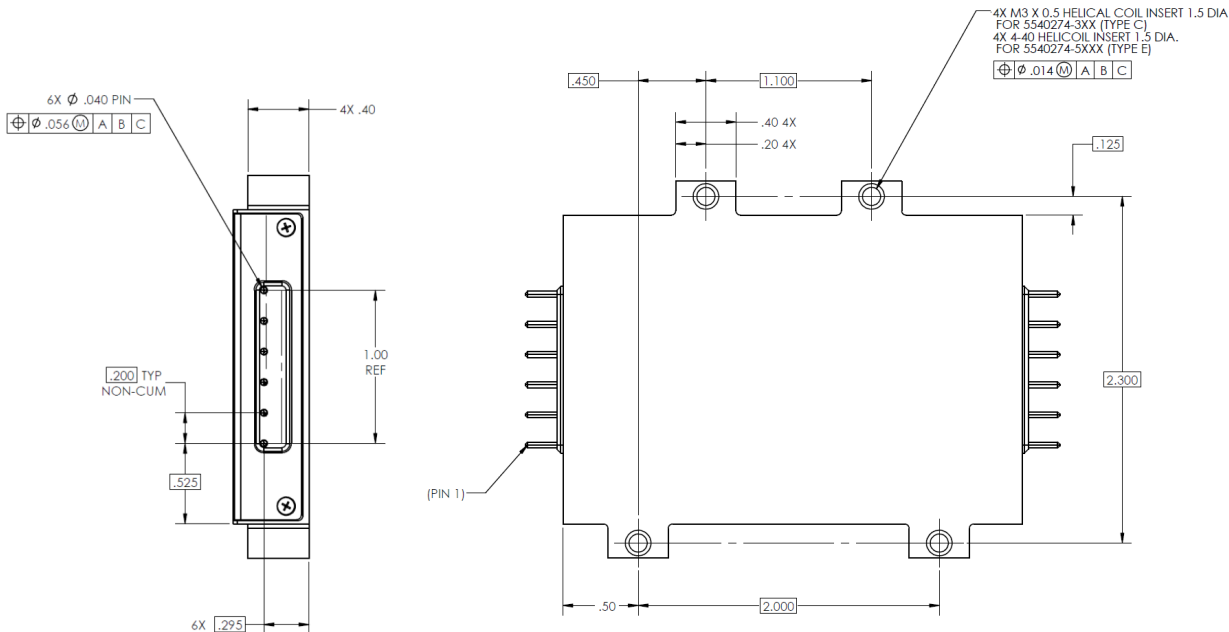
Axial Pins and Threaded Tabs Package Bottom View (-C or -E)
